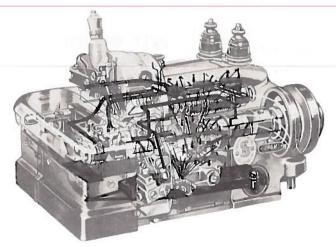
X-ray View of Class 246K Machine (Lubricating System Shown in Solid Black)
